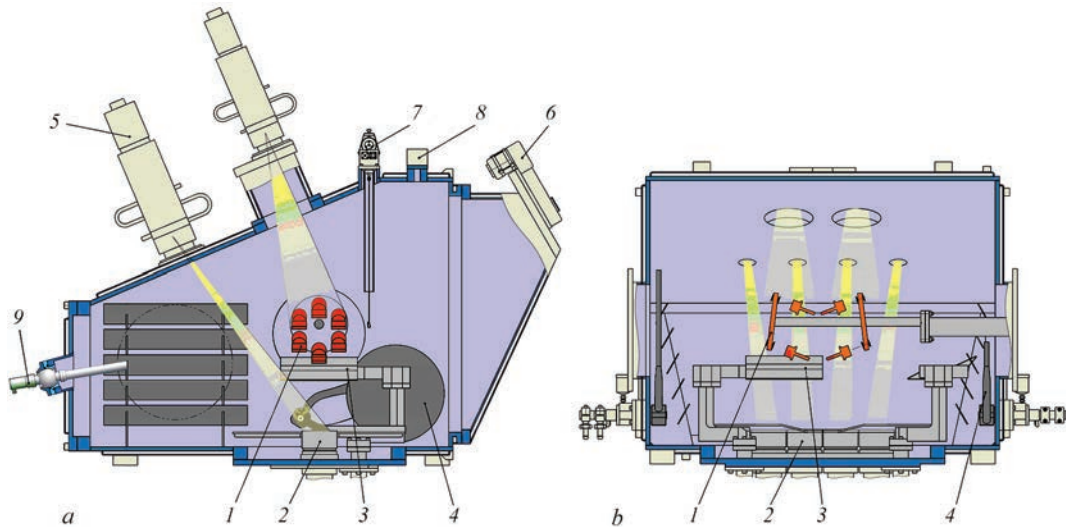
Schematic of technological process of coating deposition in unit working chamber: *a* — cross-sectional view; *b* — longitudinal view; 1 — cassette with blades; 2 — crucibles; 3 — evaporator gate valves; 4 — lock gates valves; 5 — electron beam gun; 6 — viewing system; 7 — load cell; 8 — process gas leak valve; 9 — ball lead-in for pyrometer mounting
